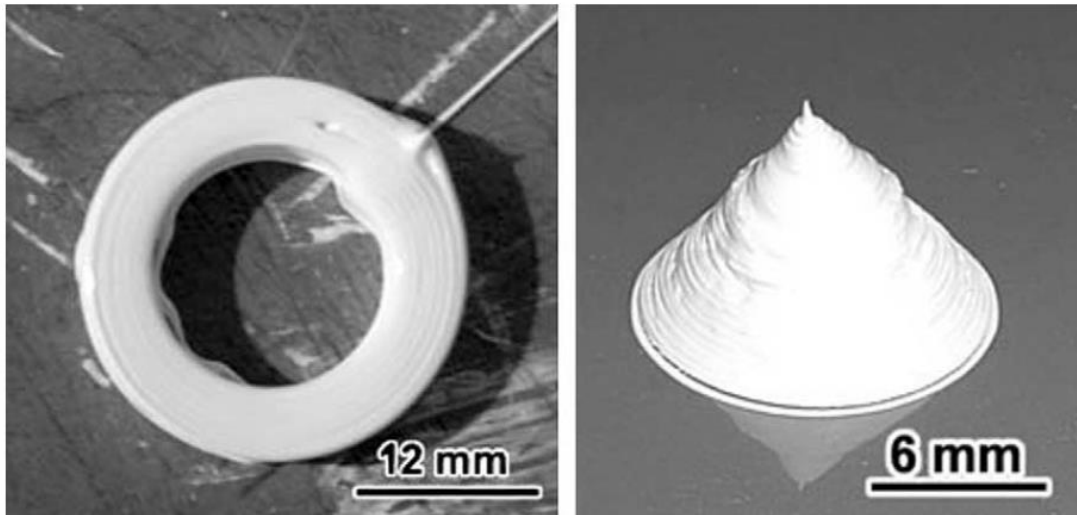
Cylinder and solid cone fabricated using the Hilmas method [36].
